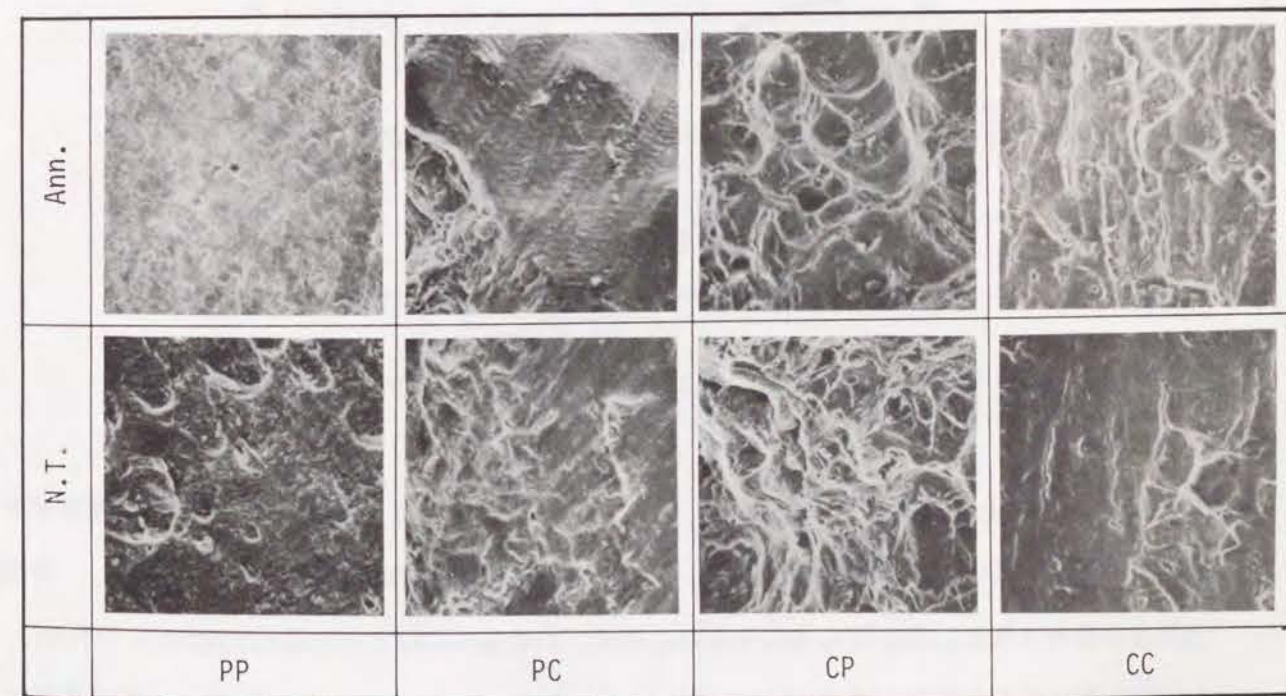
The SEM photographs of the fracture surface obtained by I J test in a vacuum
